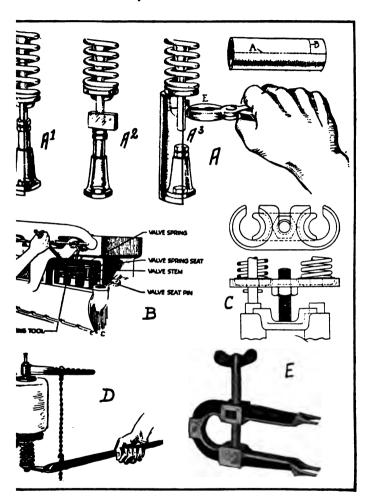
Valve Spring Lifting Tools of Varied Design.
